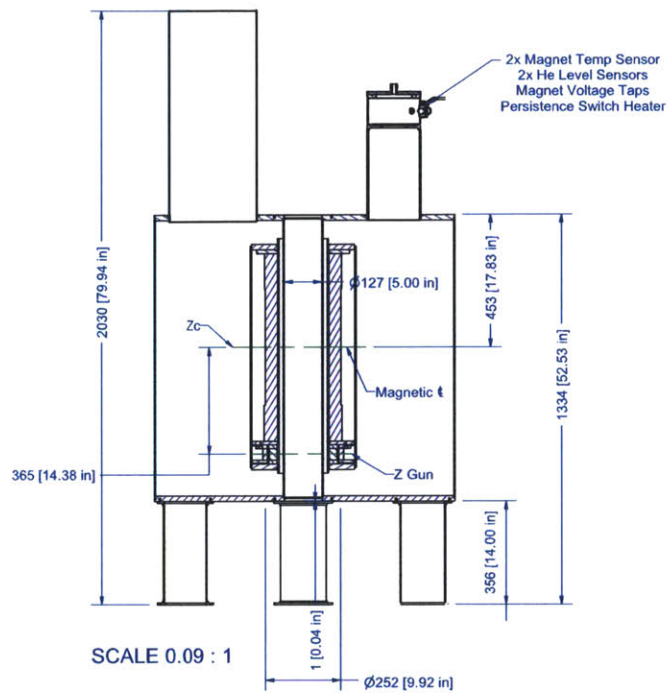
Cross-sectional CAD drawing of the 9.6 T magnet.
